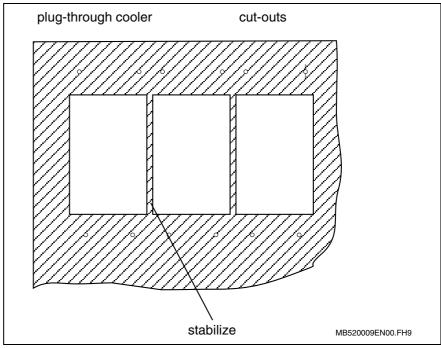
Cut-outs for devices with plug - through cooler
